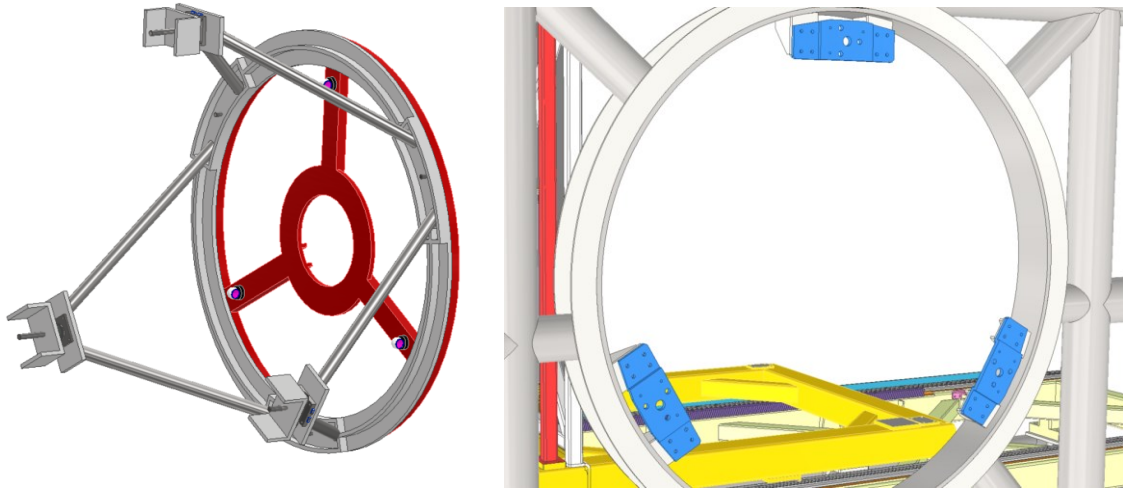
the IFP flange (left side), with the three SMRs on a circle close to the outer diameter of the IFP, on the red spiders; on the right end side, the CP interface flanges, where the IFP flange will be installed (instead of the CP of course)
